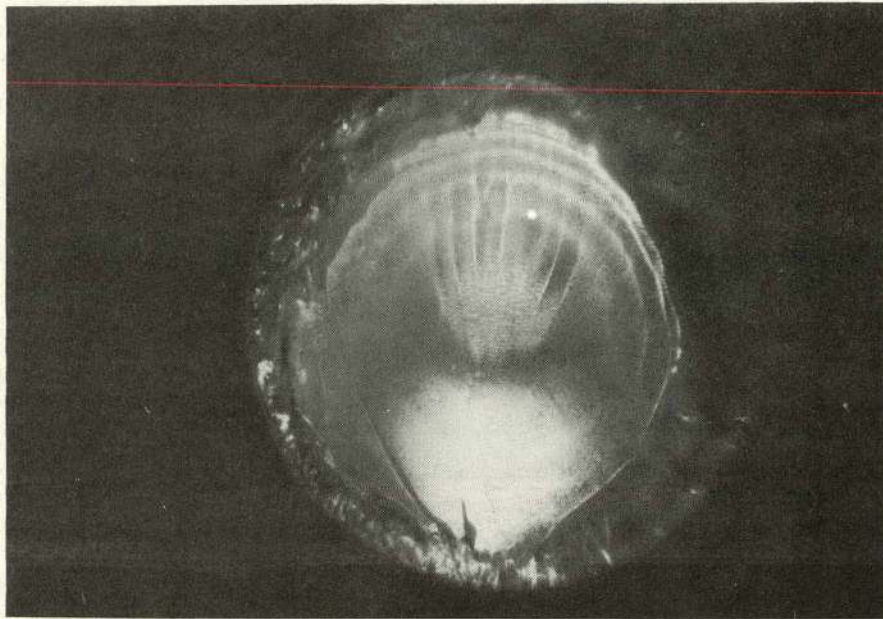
Polycarbonate Brittle Fracture Surface of 0.950-Inch-Diameter Tensile Specimen L-1 With 0.225-Inch-Deep Notch and 0.001-Inch Maximum Root Radius (4X)
